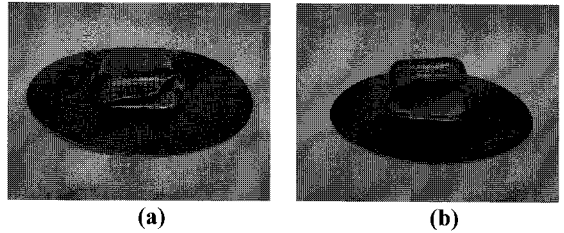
Drawing failures for set #2 (a) after 10mm drawing at 150°C, (b) after 20mm drawing at 250°C
